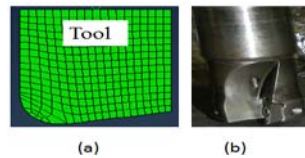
(a) 2D view Cutting tool (b) Cutting tool inserted in cutting tool holder
